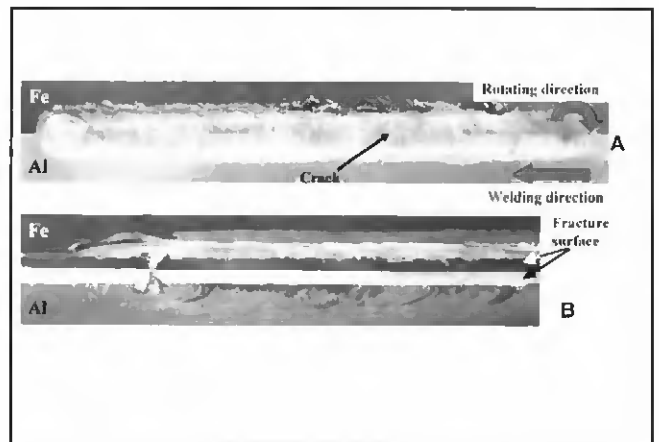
Surface view and fracture surface of the weld when welding direction was reversed, that is, the pin rotation direction was counterclockwise.
